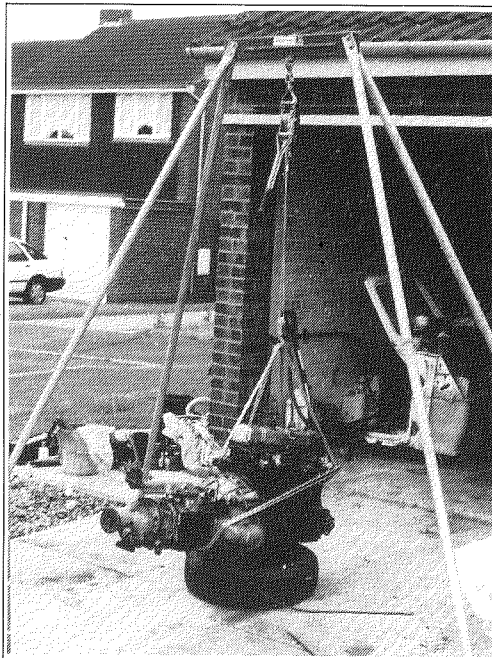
Beg or borrow an engine hoist and park the engine in place. Hoist up...
